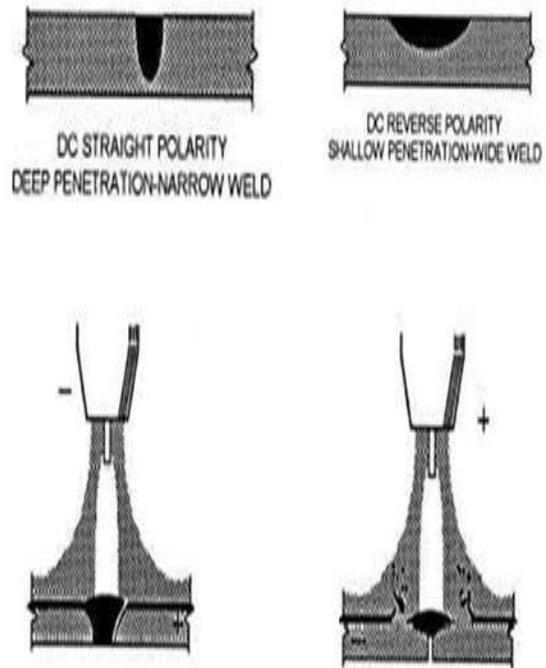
DCSP TIG and DCRP TIG weld formation
